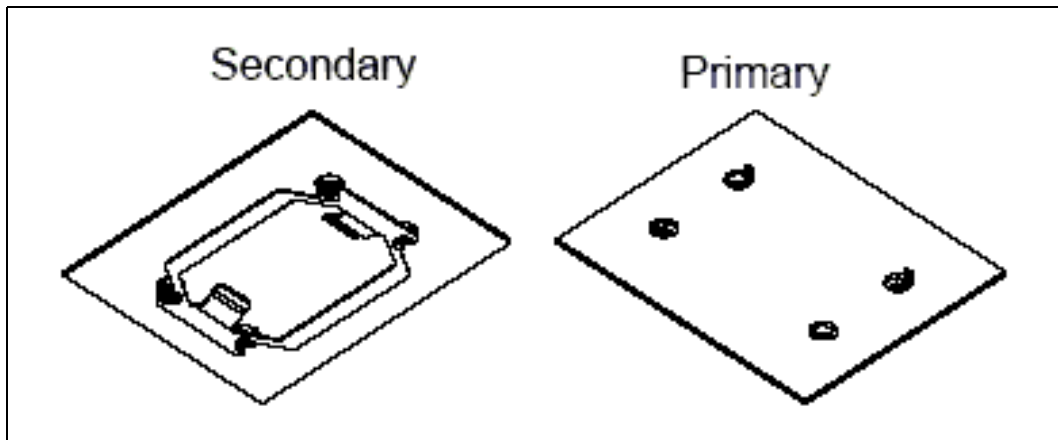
Isometric View of CEK Spring Attachment to the Base Board
